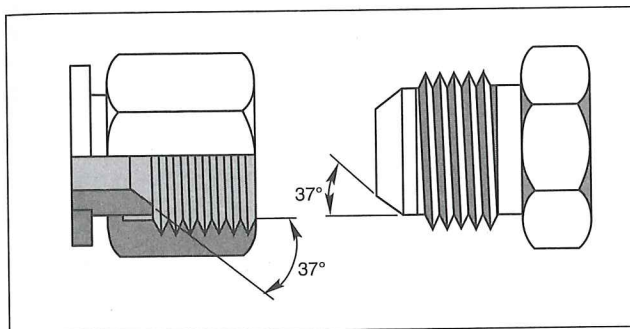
JIC couplings seal by metal-to-metal contact between mating seats.
